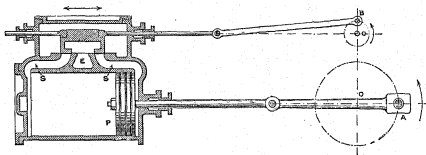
Cylinder and Slide-valve Arrangement. The valve is shown without laps or lead
